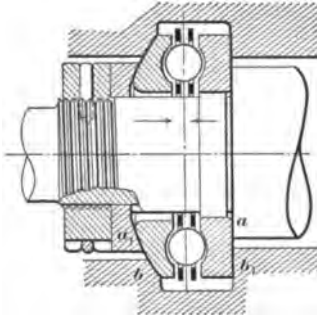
Thrust Load in Two Directions on One Collar Bearing.
